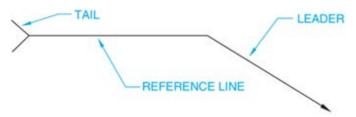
Welding symbols: reference line, tail and leader
